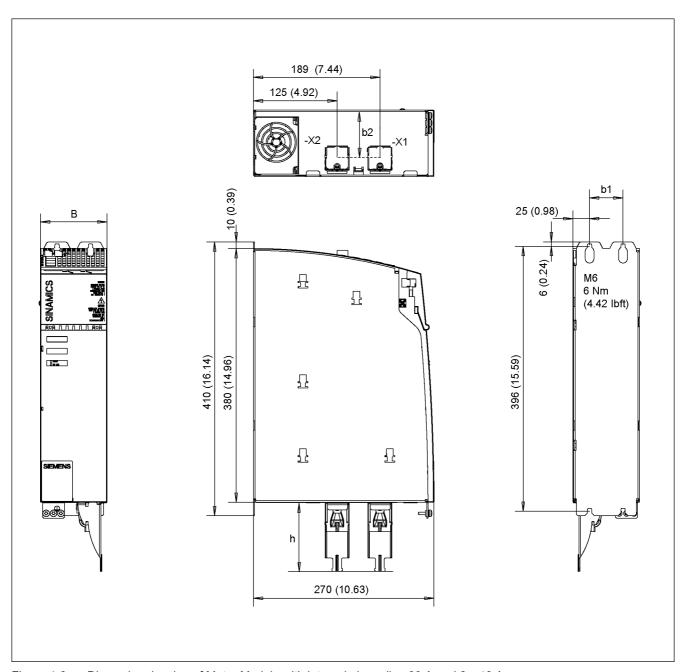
Dimension drawing of Motor Module with internal air cooling 30 A and 2 x 18 A
